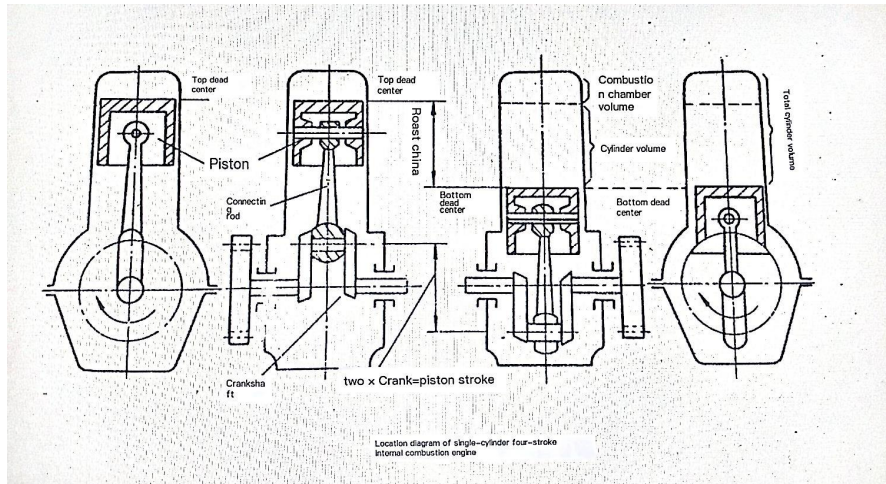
Position Diagram of single cylinder 4 stroke internal combustion engine
